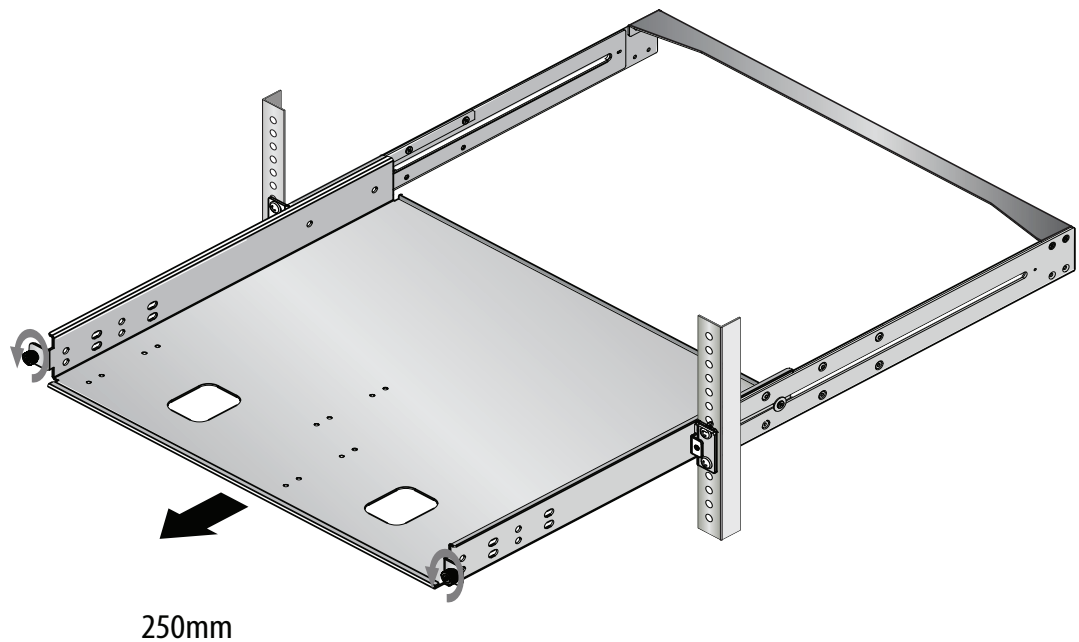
INSTALLING THE TRAY CHASSIS IN A 19-INCH EQUIPMENT RACK
